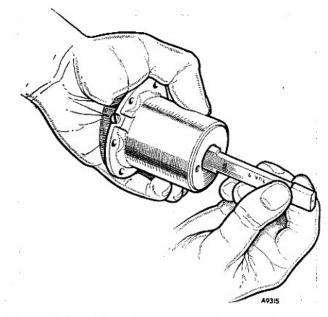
Checking the housing small bore diameter using gauge TUA 9
